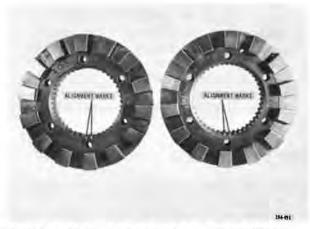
Direct and Lo-Range Alignment "O" Marks
